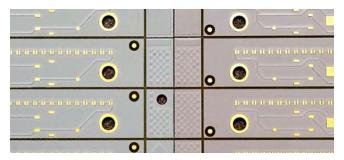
"Pinking" solder mask on ENIG board with multiple reflow cycles.
